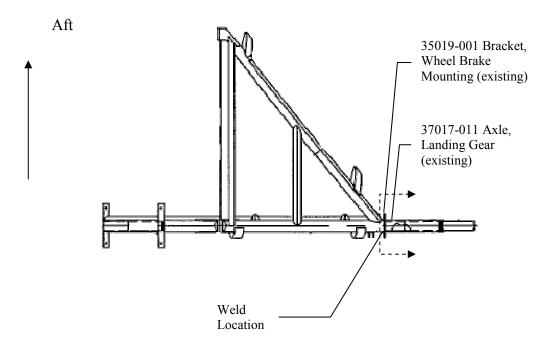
Location of Weld to be Modified-Shown on Left Landing Gear Strut Assembly (fairing removed for clarity) – Top View
